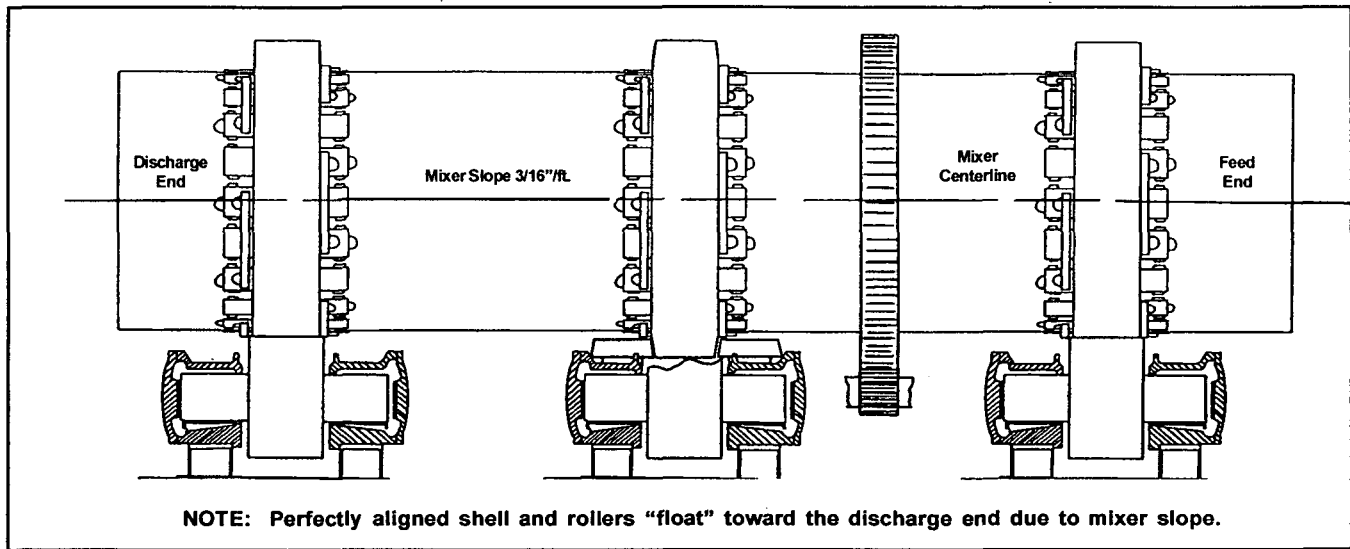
Mixer and carrying roller shafts are to bear downhill.
